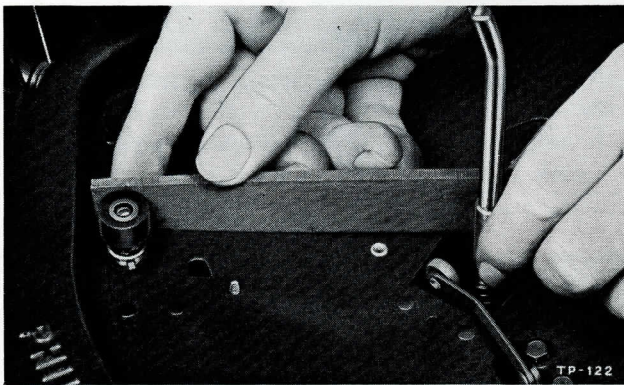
DRESSING TURNTABLE DRIVE WHEEL
